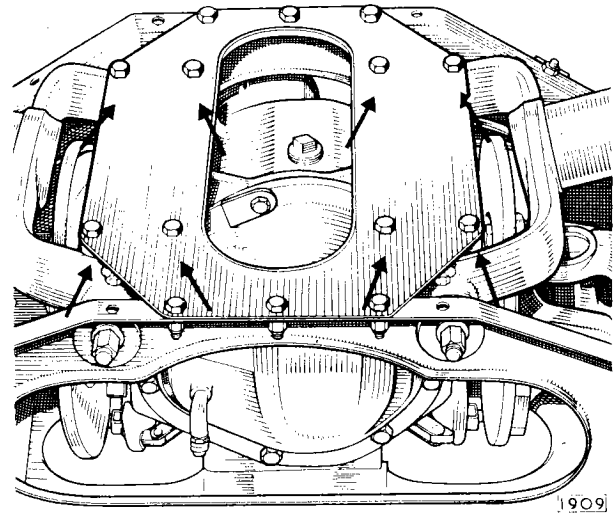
Showing the eight bolts which secure the tie plate to the inner fulcrum mounting bracket
